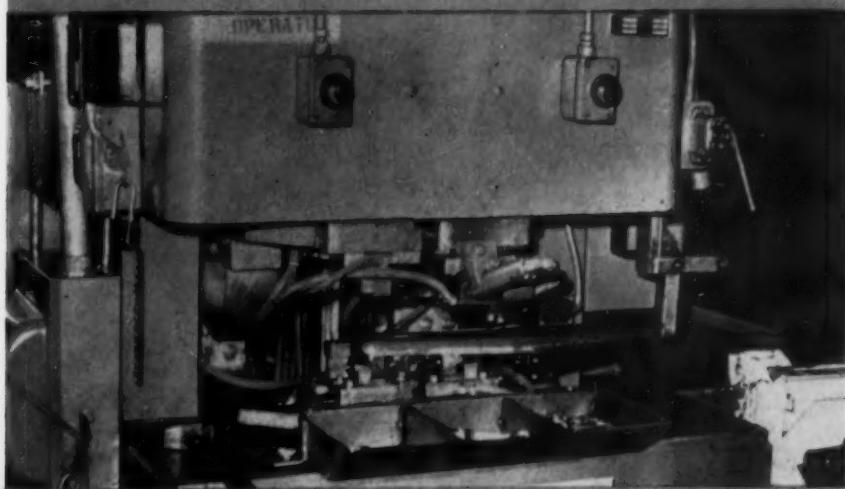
Close-up view of a progressive welder showing the convenient, yet safe, operating position of the multiple buttons which are used to control the machine's function.
